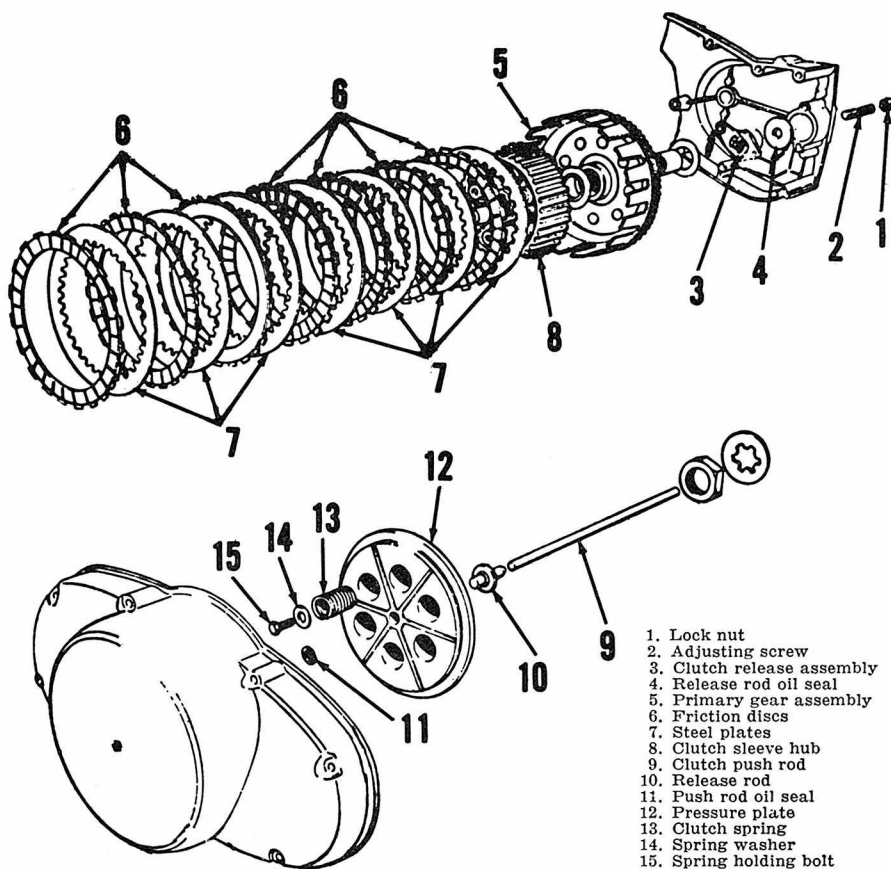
Exploded view of clutch assembly used in the T500 Suzuki.
